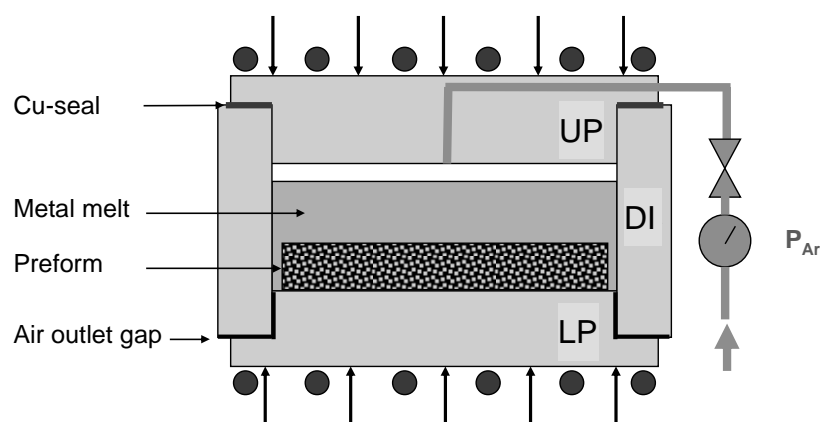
Schematic cross-sectional view through the closed gas pressure infiltration set-up. The punches (LP and UP) were heated in the platen press.
